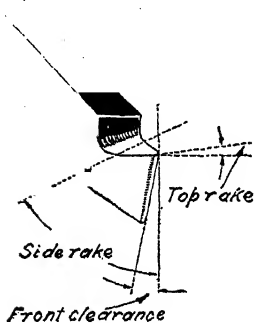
The tool shown is marked to show the cutting and clearance angles.
